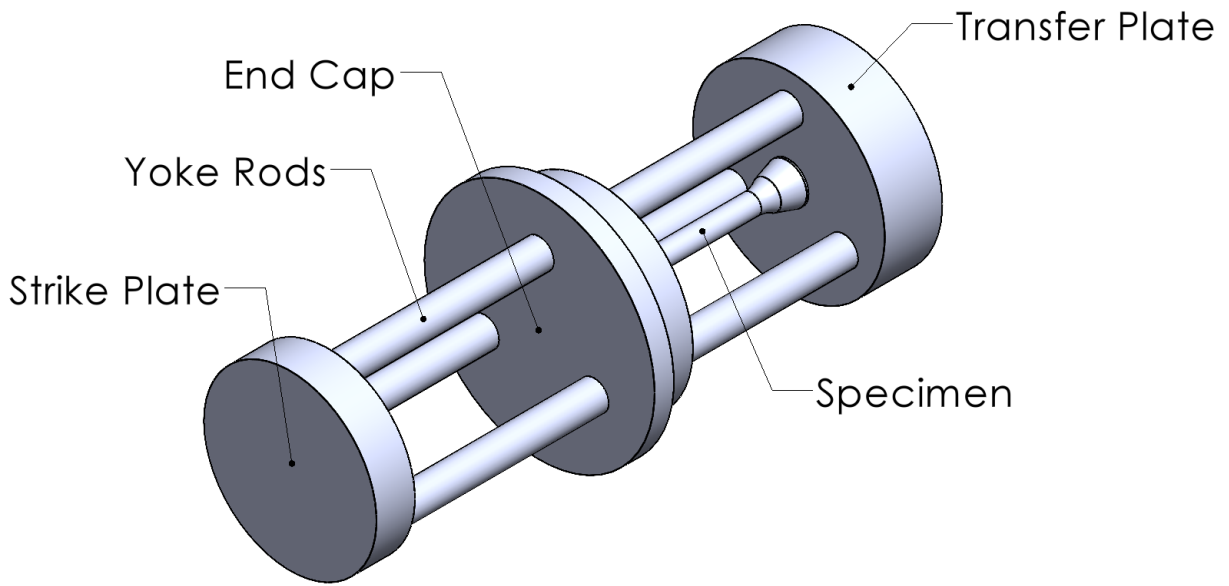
Frontal Isometric View of Defeatured Tension Yoke
